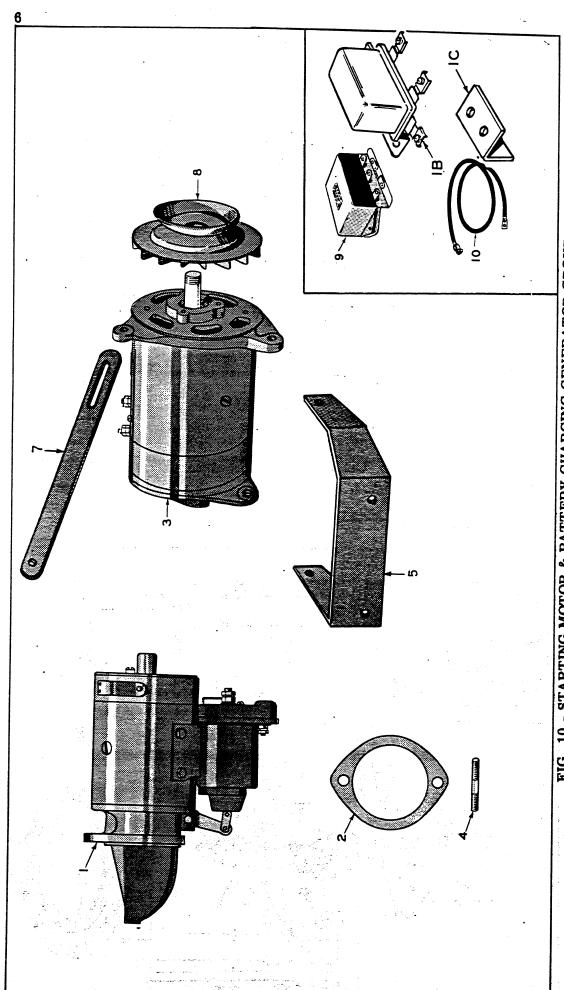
STARTING MOTOR & BATTERY CHARGING GENERATOR GROUP
